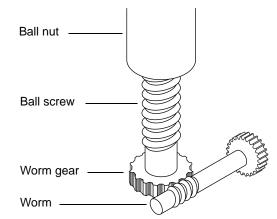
Worm, worm gear, and ball screw (lubricate with Never-seez)
